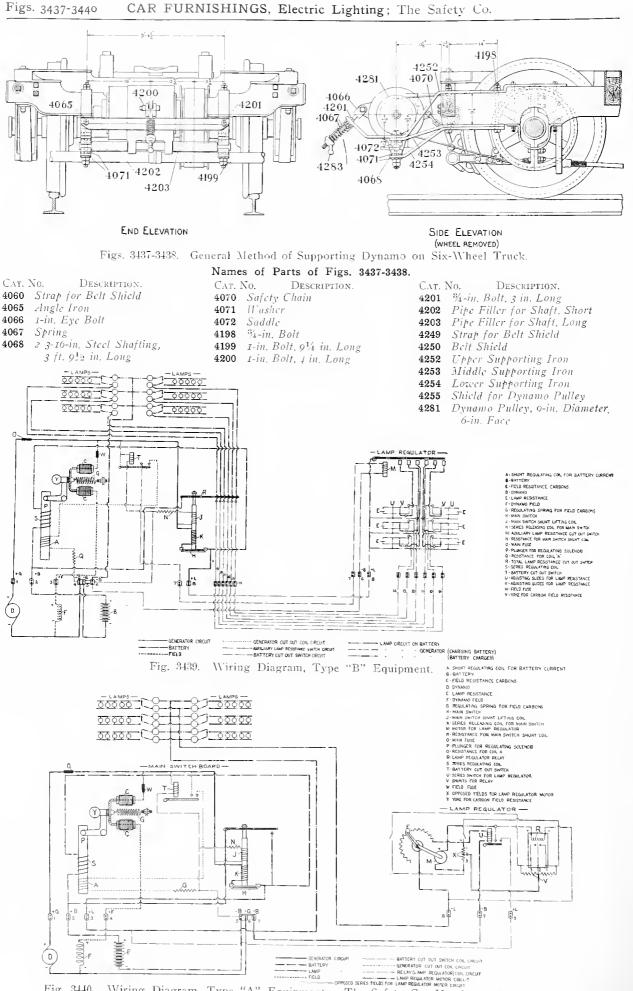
Wiring Diagram, Type "A" Equipment. The Safety Car Heating & Lighting Co. (402)
